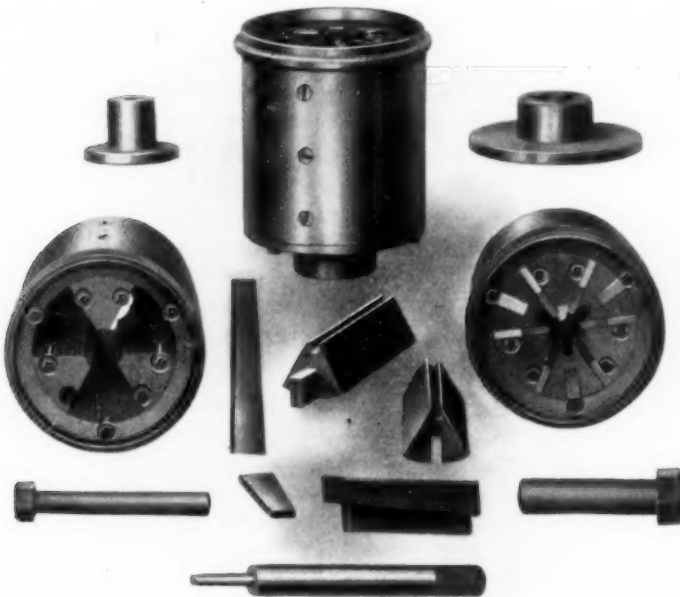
CUTTER HEAD AND ATTACHMENTS
